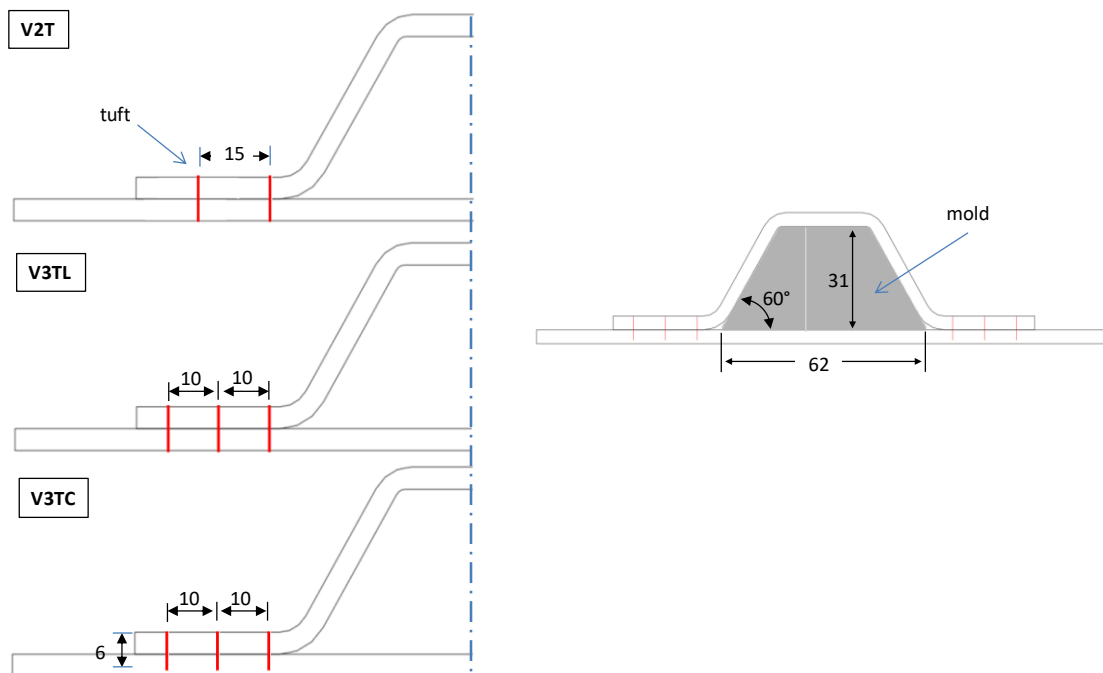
Schematic illustration of the three specimen configurations and the inner dimensions based on the mold.
